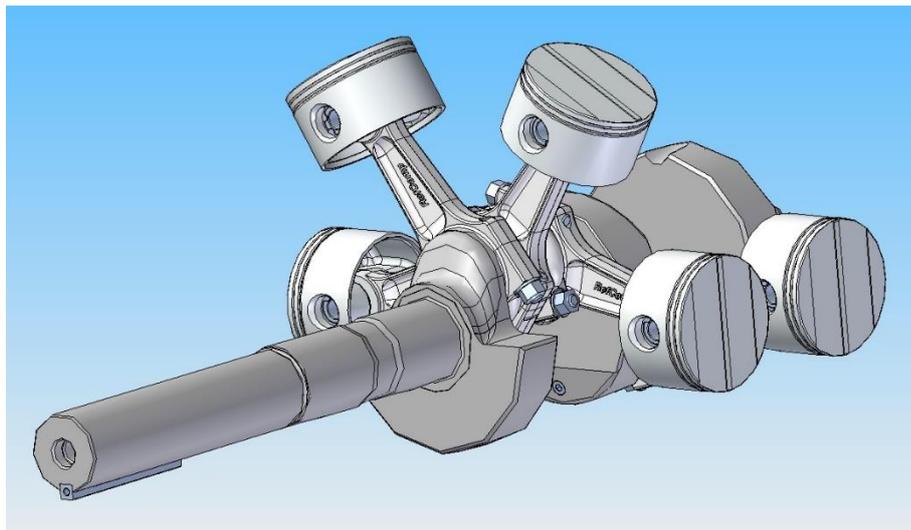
Motor shaft and connecting rod for PP4-L/H and all 6 and 8-cylinder-models
